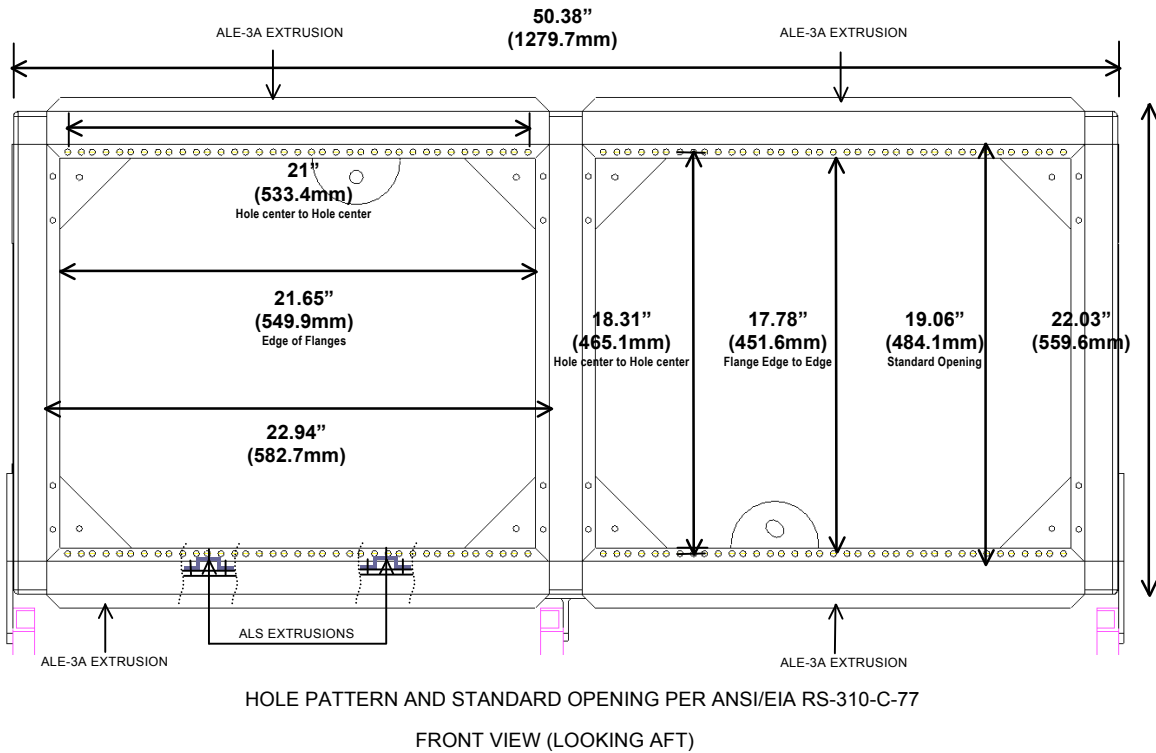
, Front View of SI CWR with Interface Dimensions
